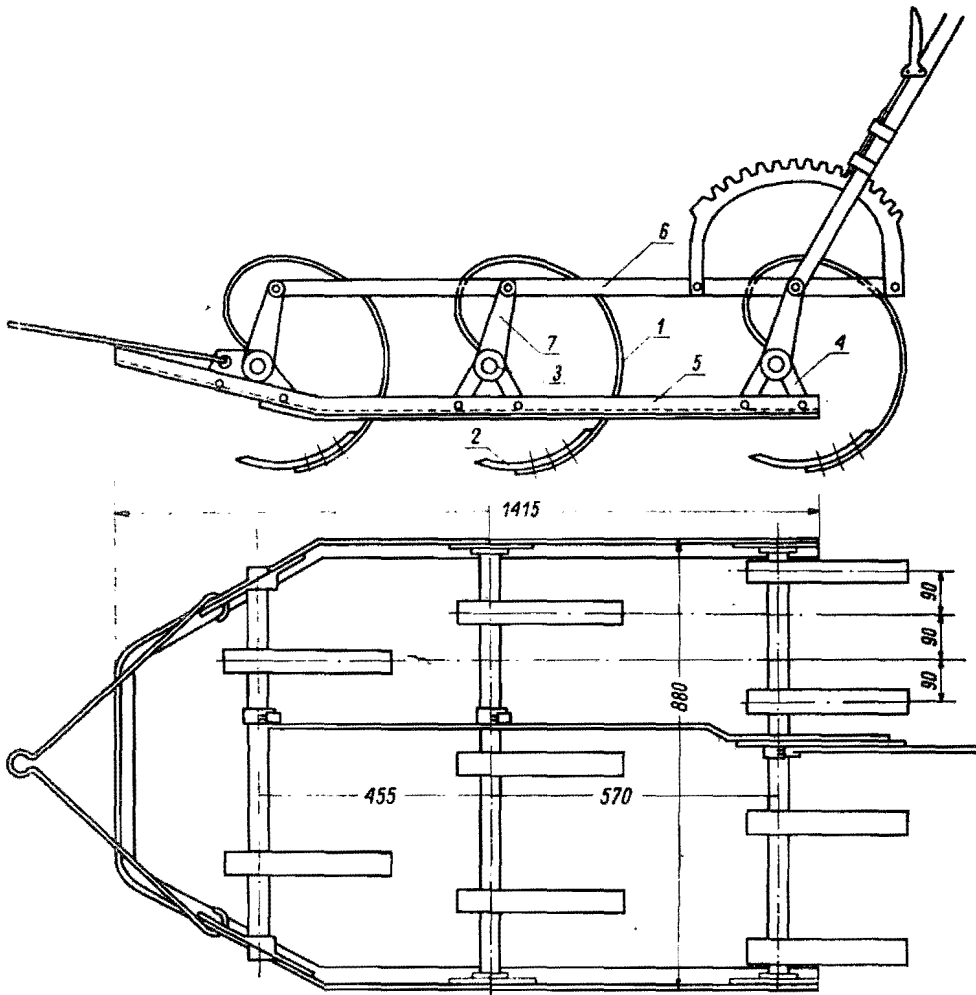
Spring-tooth horse-drawn harrow: 1 — spring tooth; 2 — shovel; 3 — shaft; 4 — shaft holder; 5 — frame; 6 — lifting link; 7 — lifting arms.
